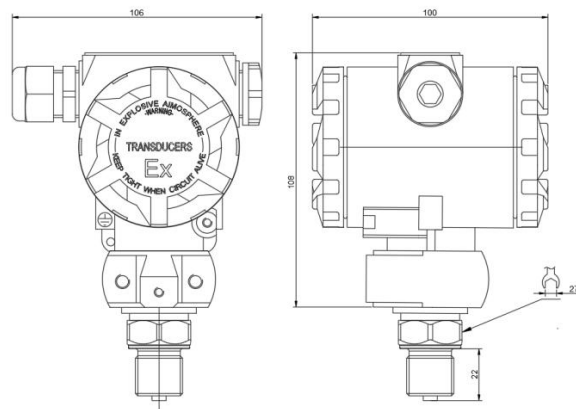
Dimensions of the conventional pressure transmitter (unit: mm)
